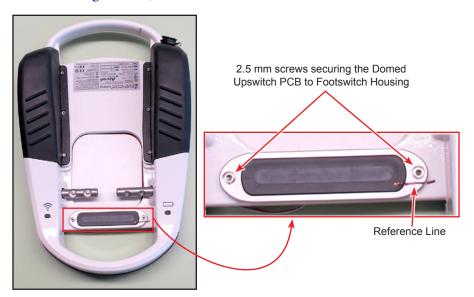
The Domed Upswitch PCB Assembly Secured to the Main Housing
